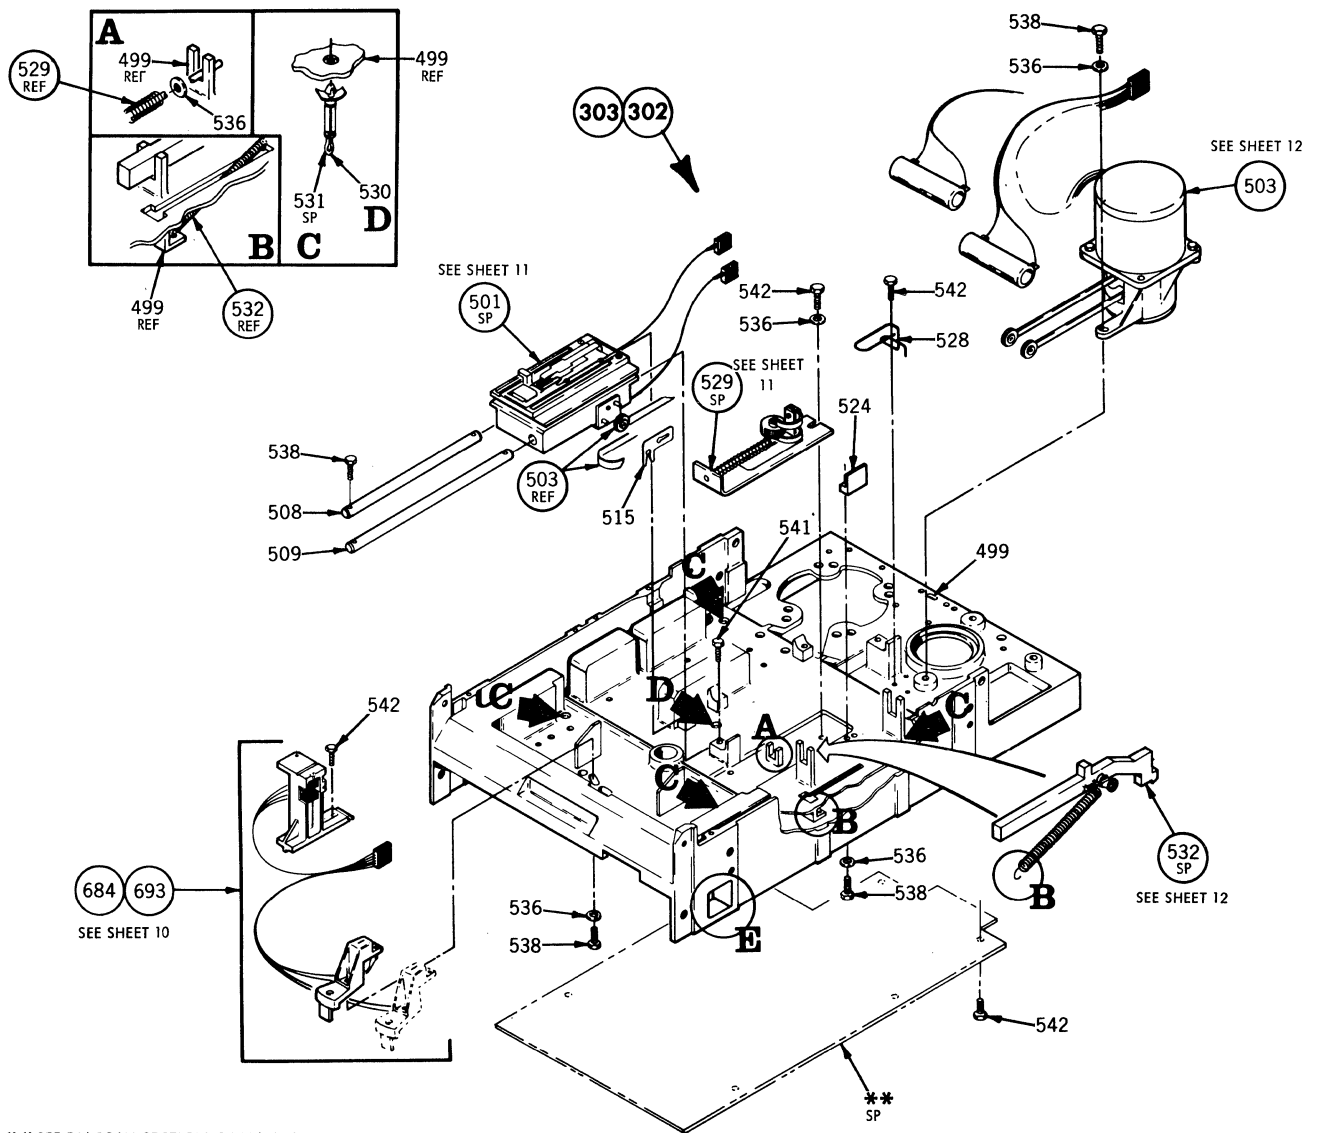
TOP MECHANICAL ASSEMBLY (SHEET 1 OF 2)
